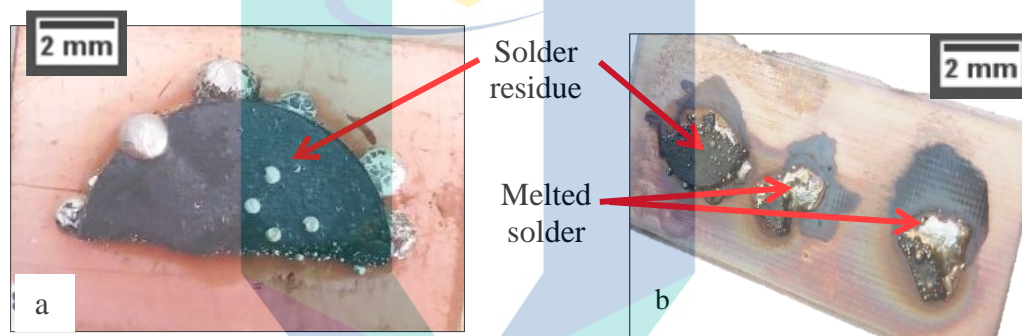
The pre-test of the sample size used to melt on the Cu board
